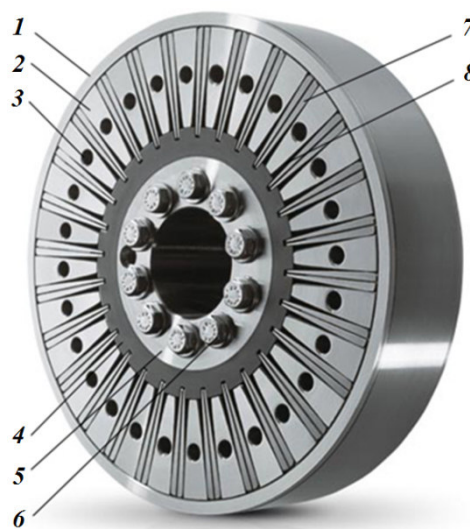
Design of the torsional vibration damper Geislinger D60/14/2 [4]: 1 – external housing; 2 – flywheel sector; 3 – hole for fixing the flywheel with a lid; 4 – inner rim for fixing spring springs; 5 – flange for attaching the damper to the diesel crankshaft; 6 – bolts for attaching the damper to the diesel crankshaft; 7 – spring springs; 8 – cavities for oil passage
